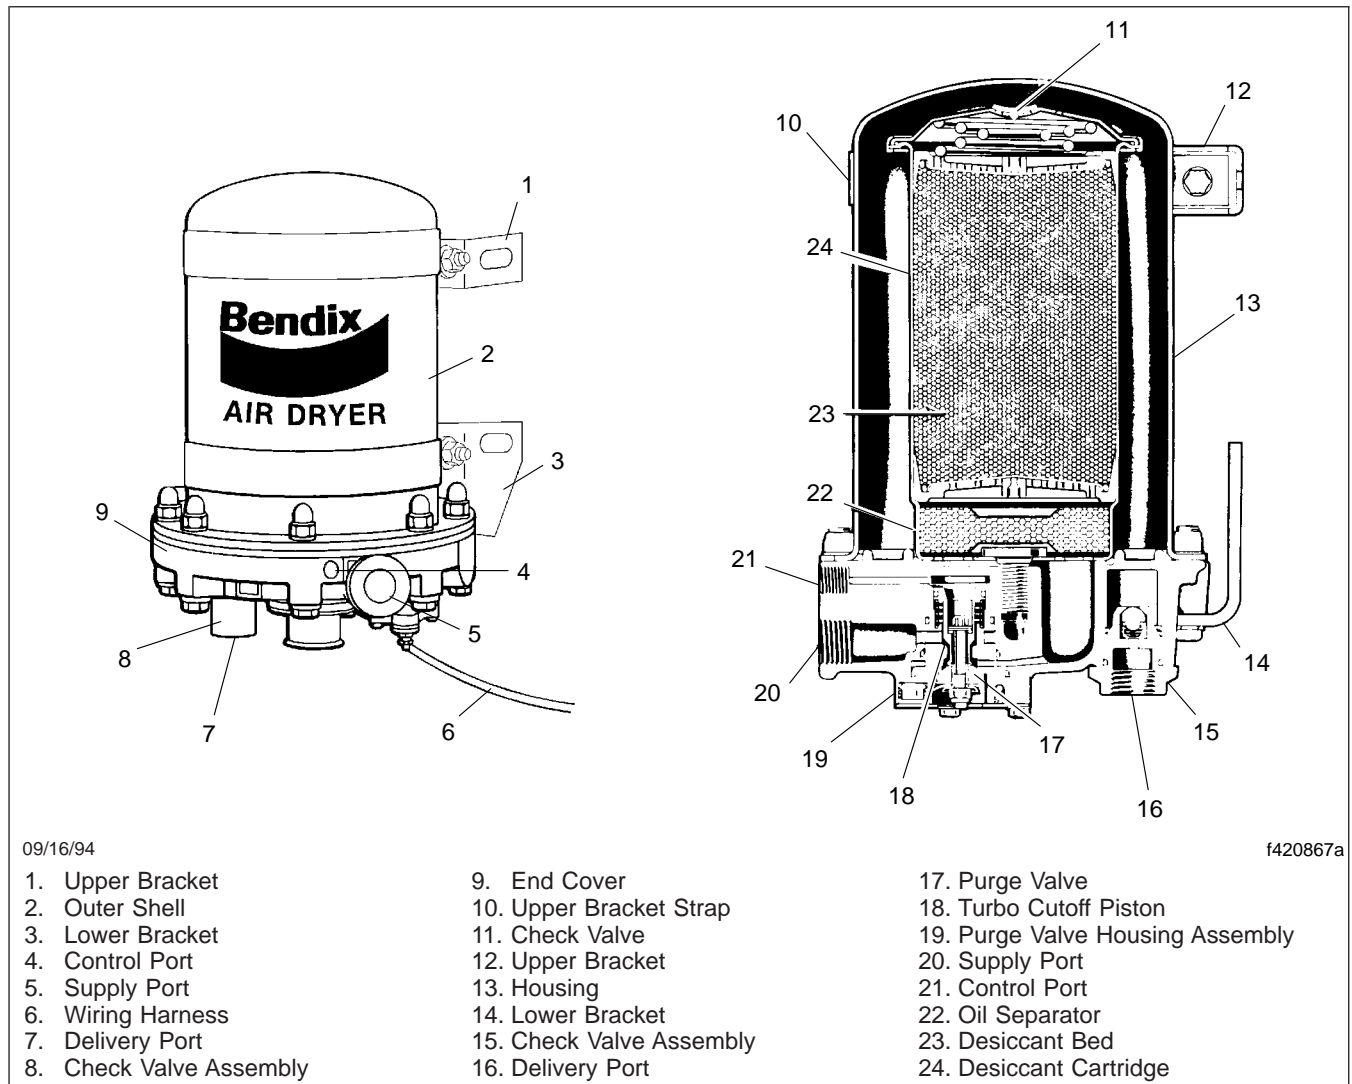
, Bendix AD-9 Air Dryer (cutaway view)
